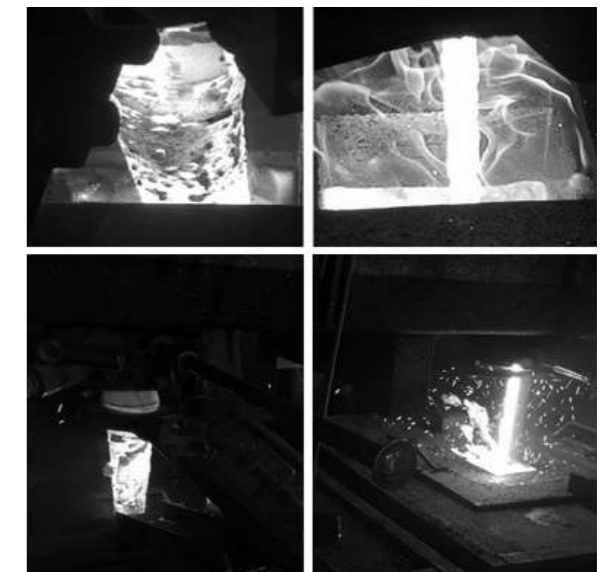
Casting from tundish to mold with open stream (right-hand side) and Shrouded stream (left-hand side).
